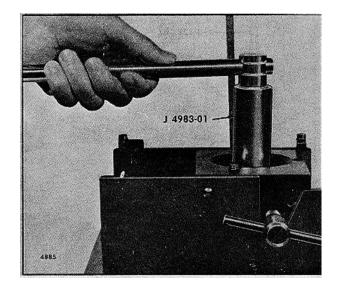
Removing Injector Nut using Tool J 4983-01
